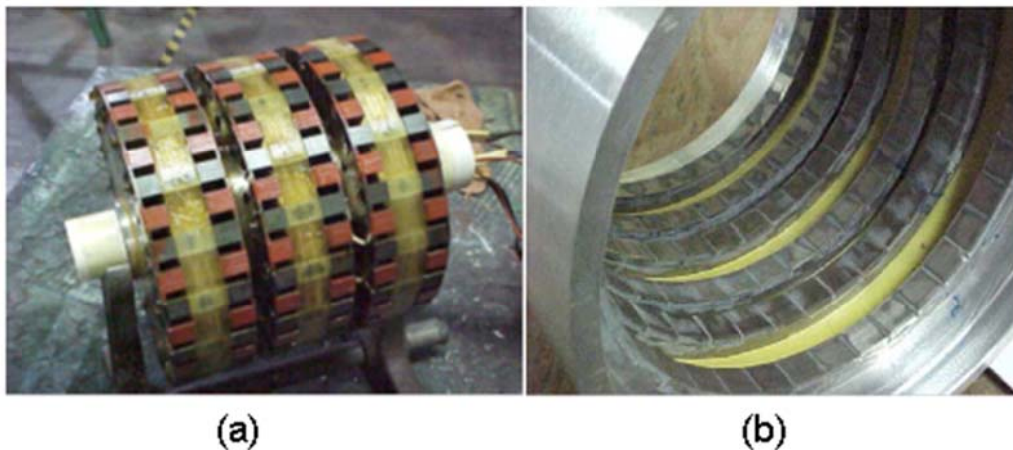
Transverse flux PM machines (a) stator (b) rotor [36].
